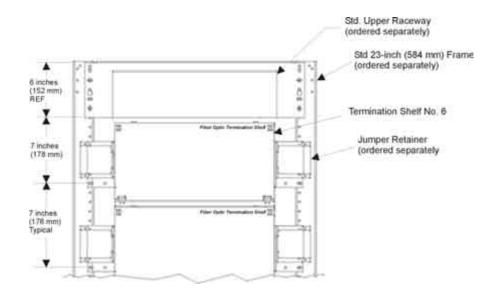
Locating Mounting Holes for LPST-S-SCUU-AR-432-49 or LPST-W-SCUU-AR-432-49 MAMU in Standard 23-inch (584 mm) Frame
